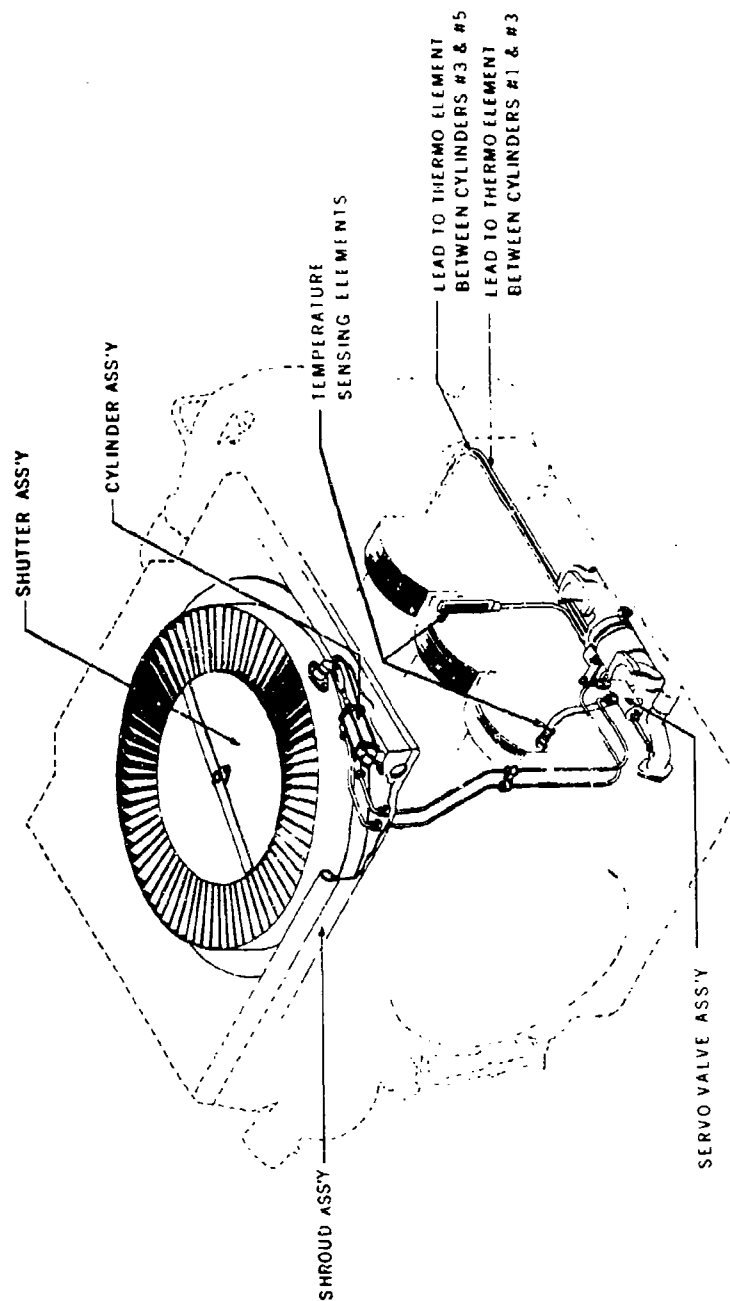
AQS-895-3 Air-cooled Engine Winterization Shutter Assembly (Ref. 2)
